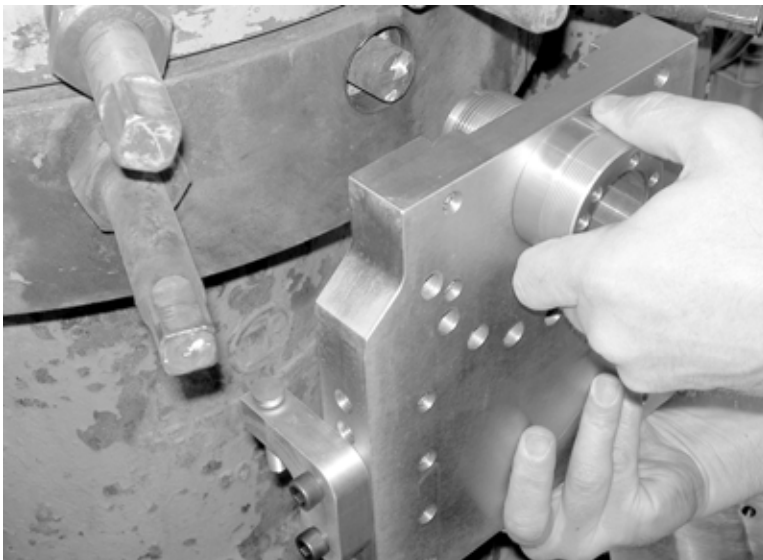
Attach the saddle by screwing the gland adapter into the flange.
